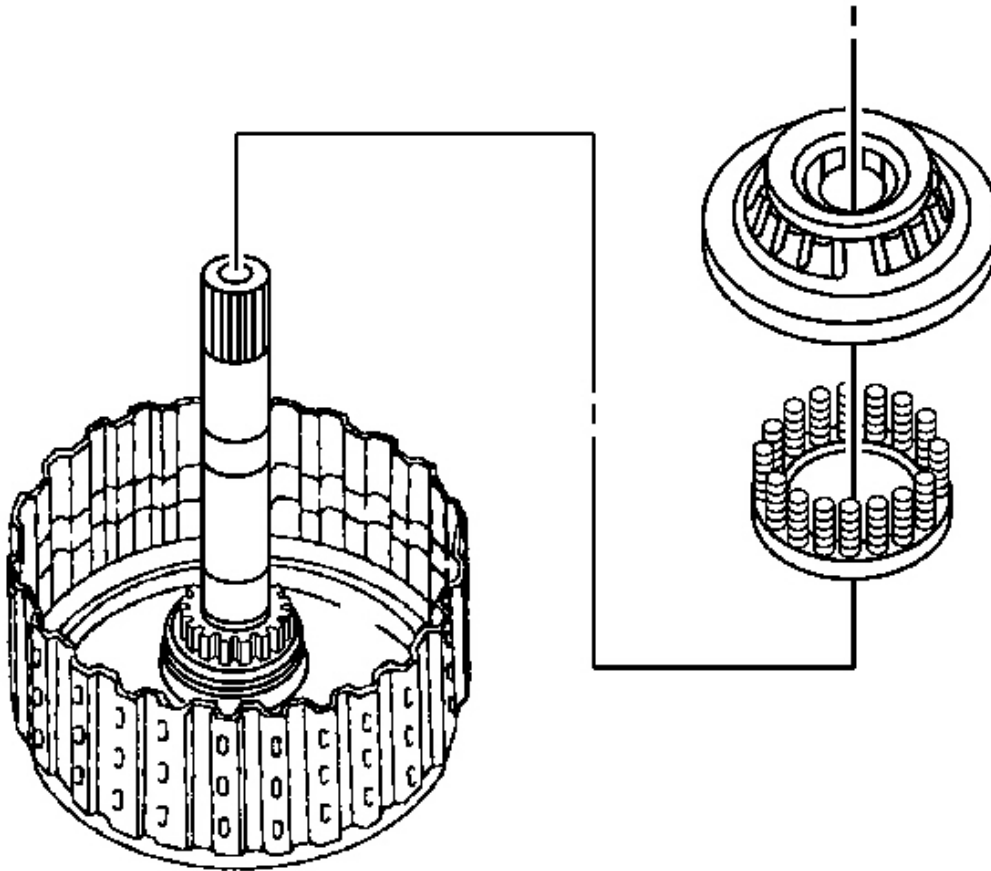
Clutch Balancer & Forward Clutch Return Spring
